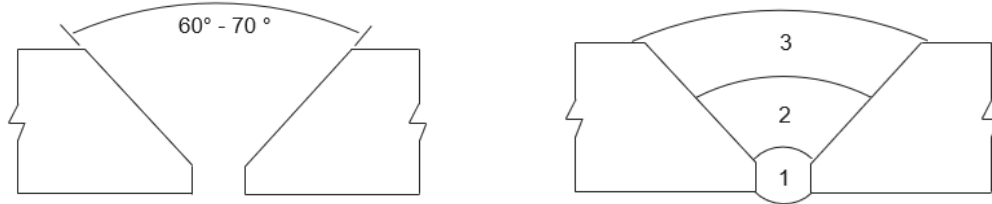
Weld preparation (left), Pass location (right)
